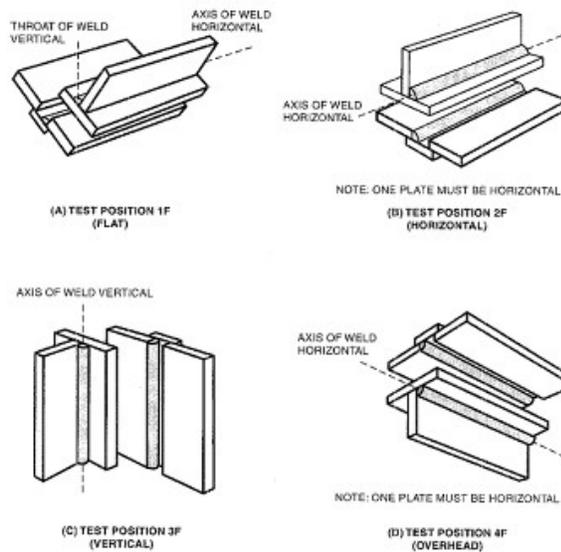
Positions of Test Plates for Fillet Welds
